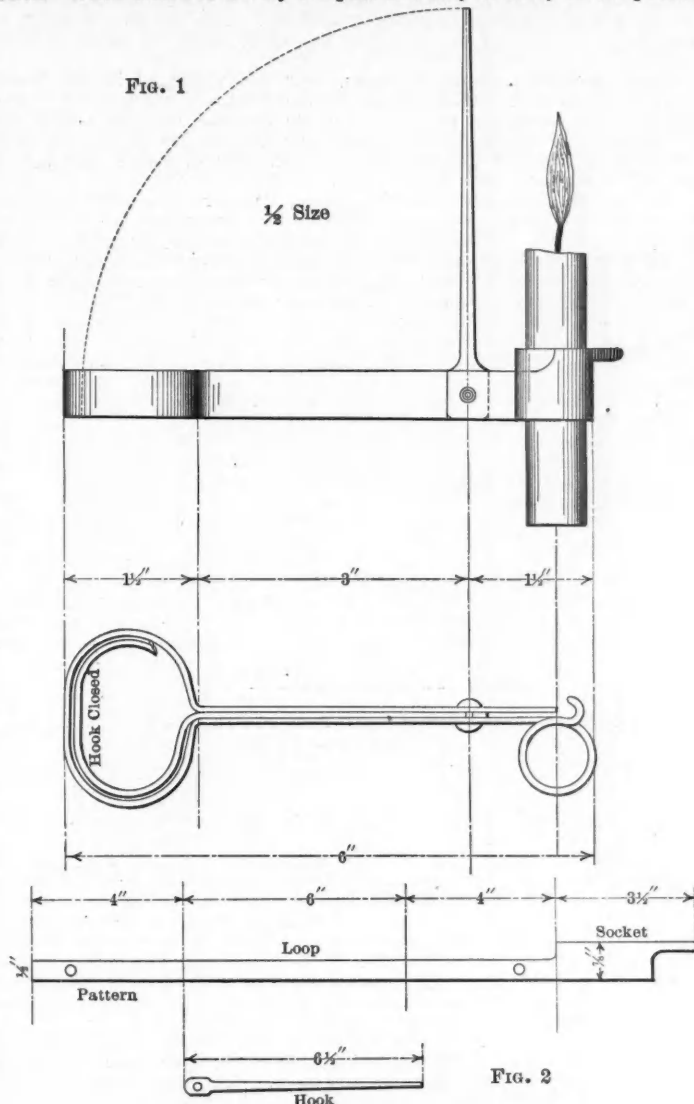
CANDLE-HOLDER FOR MINING ENGINEERS.
